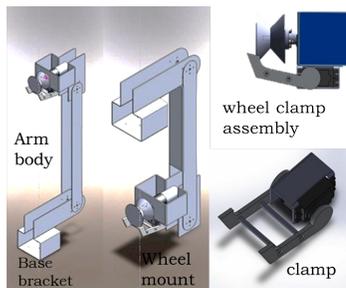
CAD model of Arm, clamp, and wheel-clamp assembly
